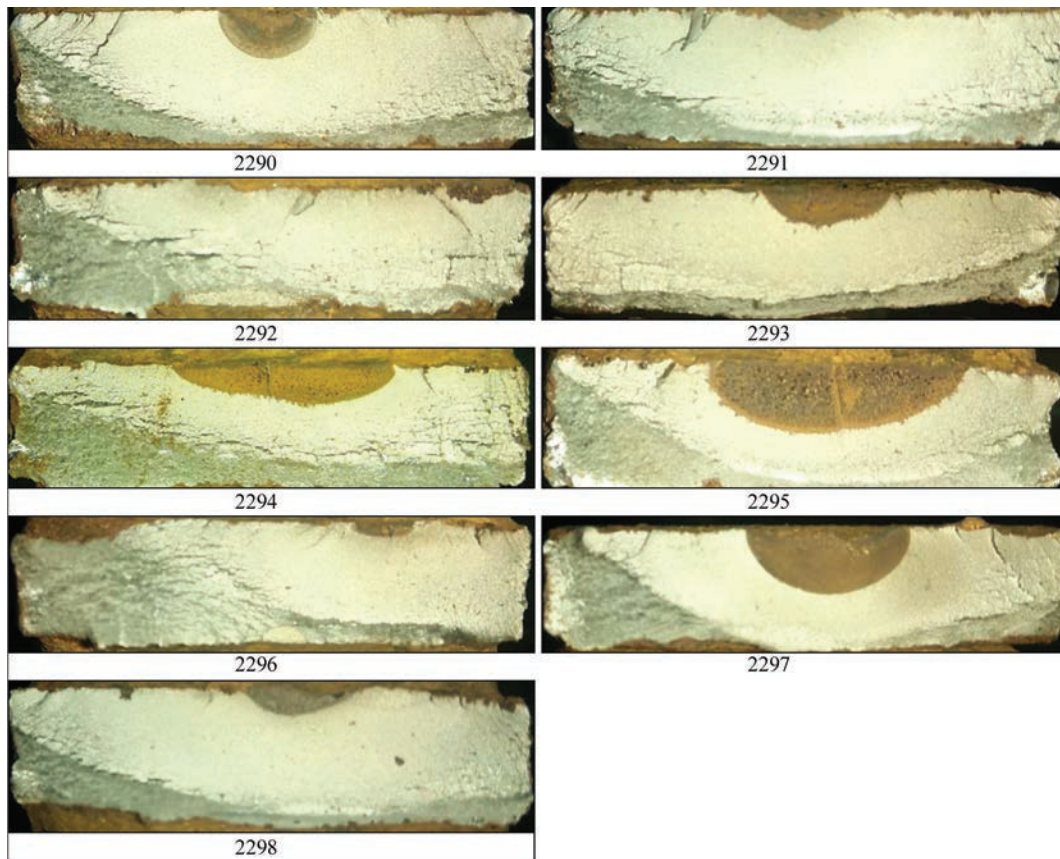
Fatigue fractures of specimens of T-welded joints of 15KhSND steel with surface fatigue cracks, which were not strengthened by HFMP after corrosion testing for 1200 h in KST-1 chamber (see Table 1)
